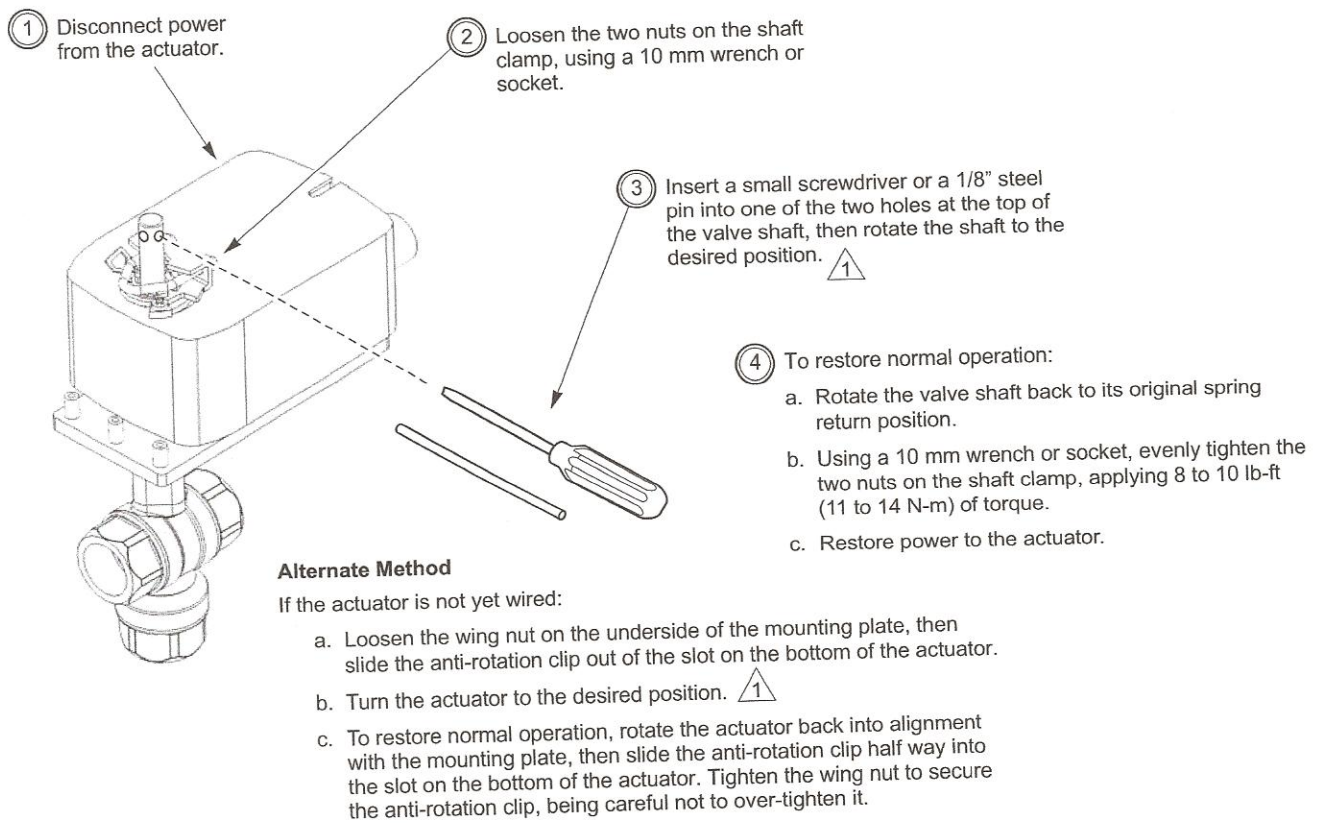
Manually Opening Valve Assemblies Equipped with Mx40-704x Series Actuators.
